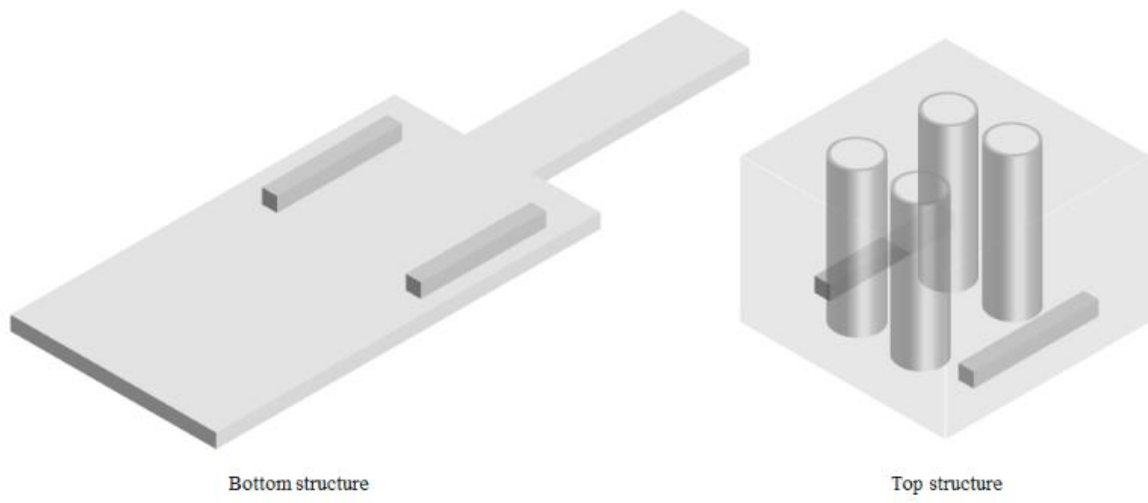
Schematic of bottom and top structure for mounting spring
